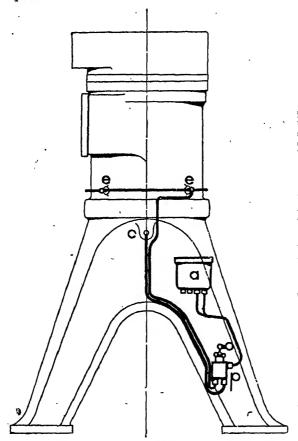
Lubricating System of Cylinder and Gudgeon Pin.
